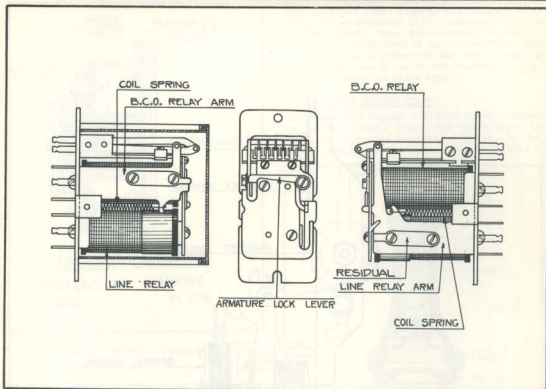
ROTARY LINESWITCH RELAY ASSEMBLY (OLD)
